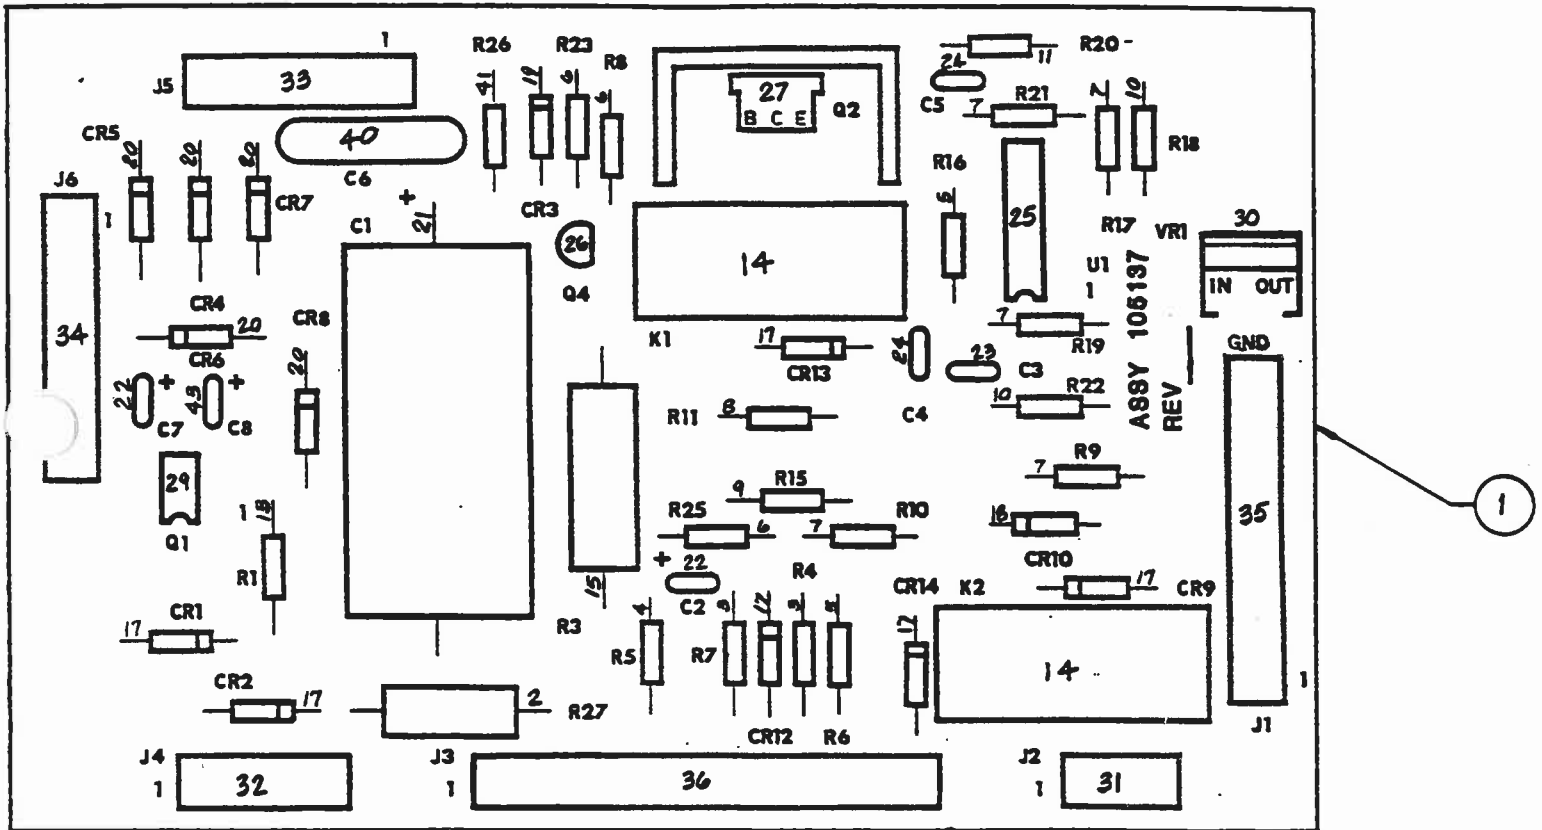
, Motor Drive PCB Assembly, PDI/E
